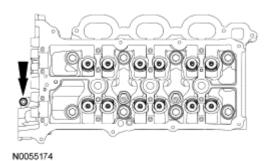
Locating M6 Bolt Courtesy of FORD MOTOR CO.
